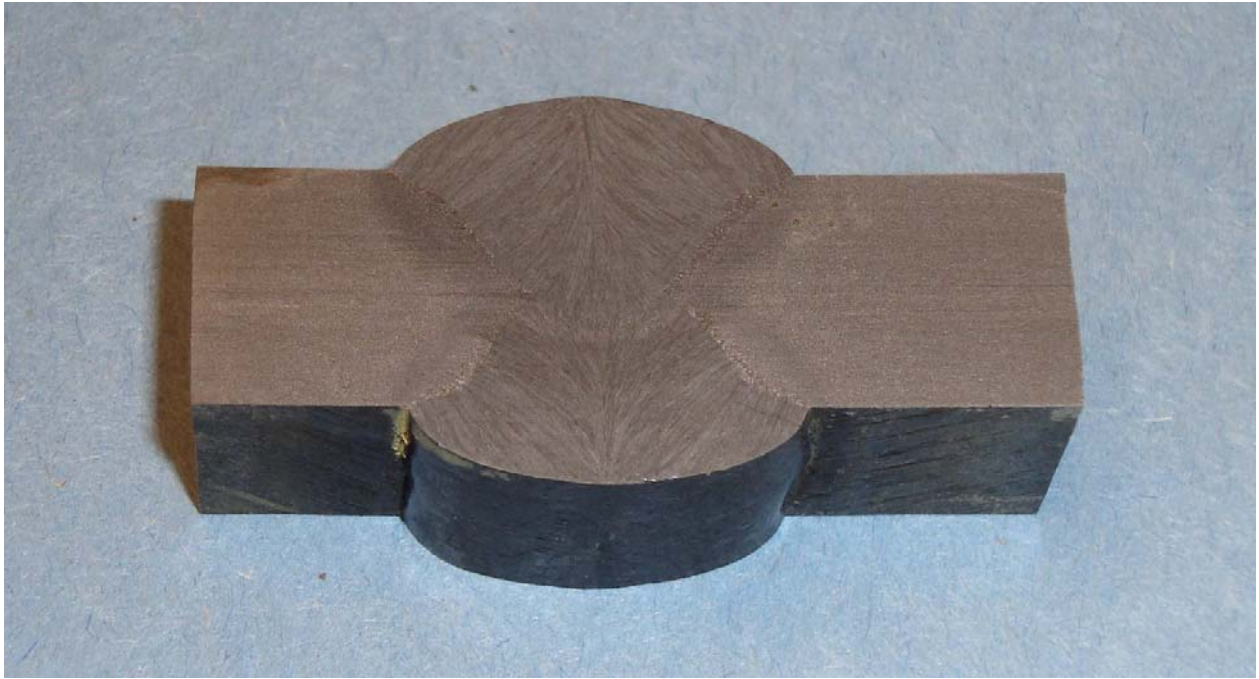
Sample Macro, 1/2" DS Weld Procedure
